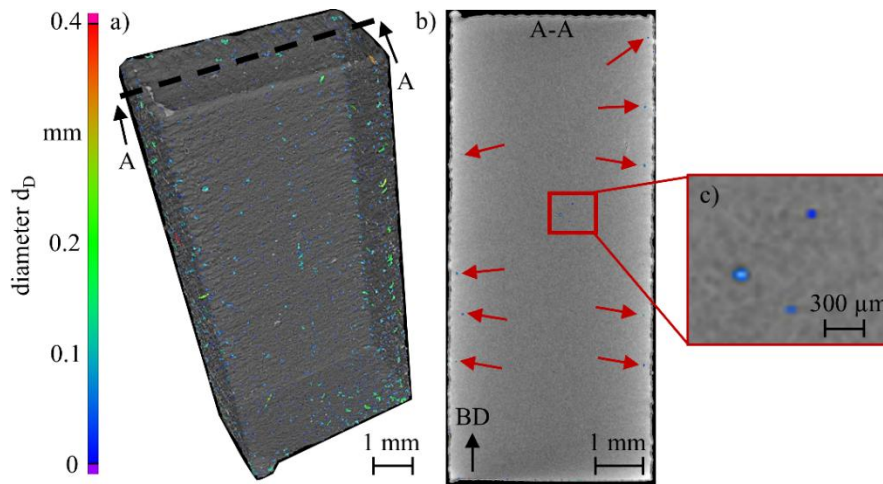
μCT analysis of a rectangular specimen; a) three-dimensional rendering with colour-coded defect diameter; b) section A-A showing internal defects; c) detail view of larger defects
